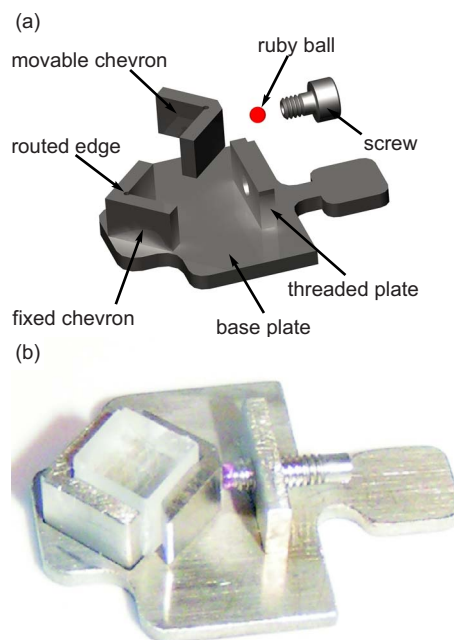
(Color online) Sample holder for system 2. (a) Design drawing showing the clamping mechanism with a fixed and a movable chevron with routed inner edges. The clamping force is generated by a screw threaded through a spring plate. (b) Photograph of a crystal mounted in the sample holder.
